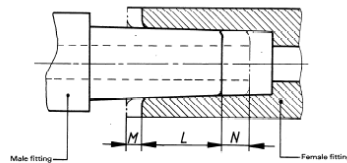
Typical assembly of 6% (Luer) conical fittings
